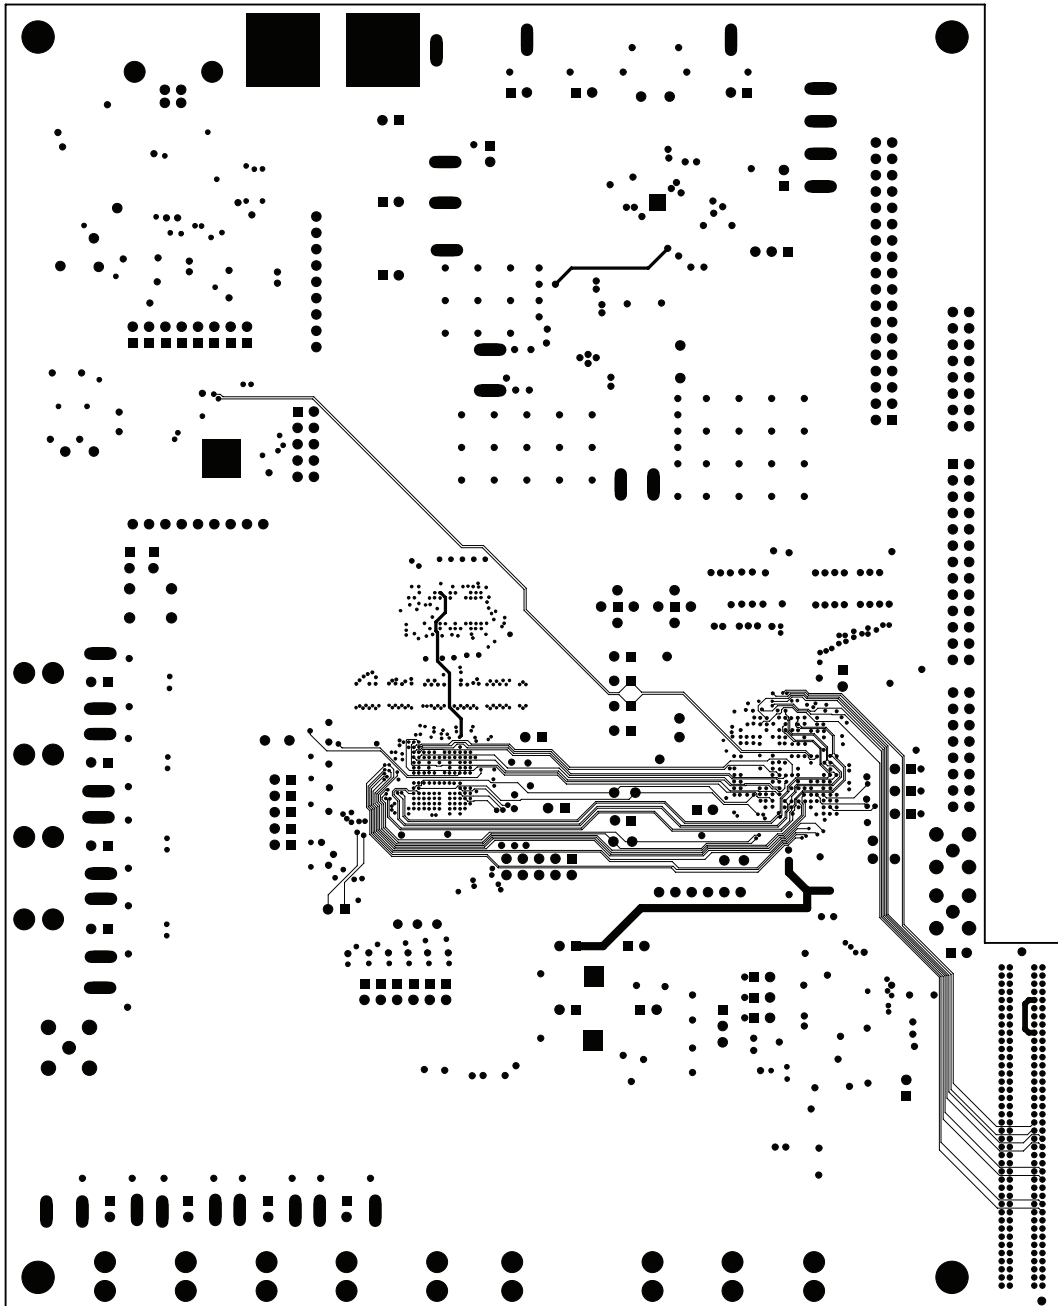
MAX9530 EV Kit PCB Layout—Layer 6
